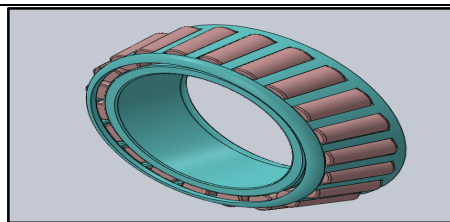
Isometric View of Single Row Tapered Roller Bearing
